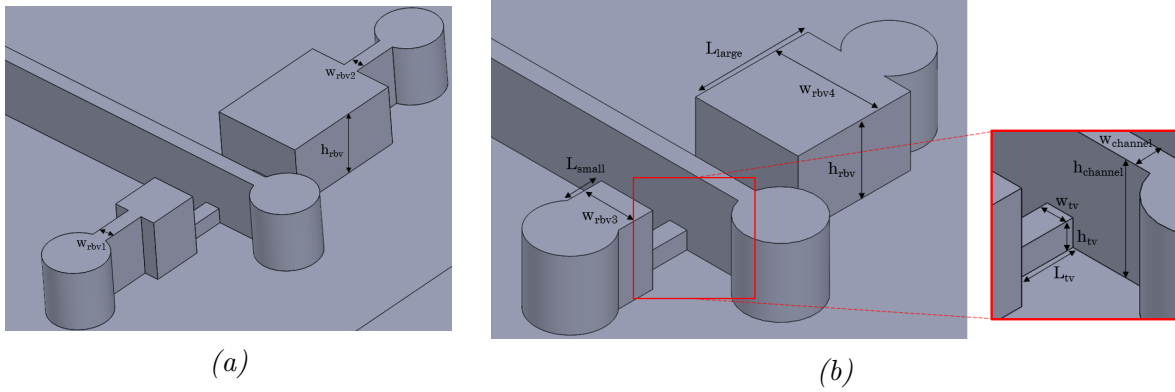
The dimensions of the retention burst valves of the chip with narrowing after inlet (a) and without narrowing (b) including magnification of the trigger valve.
